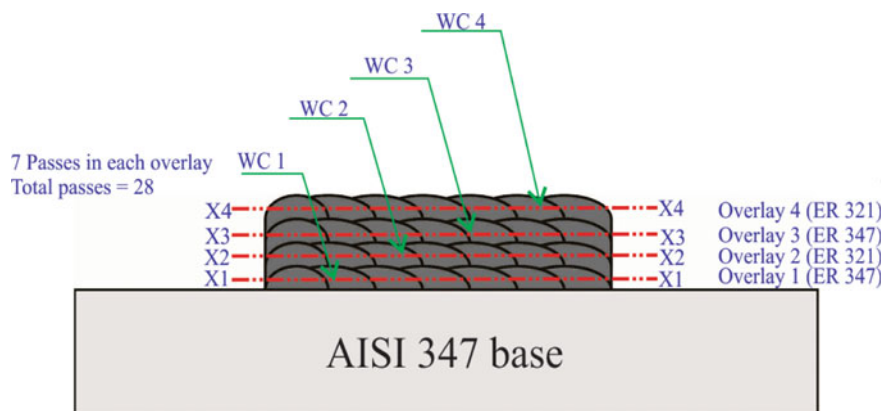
Schematic view of weld multi-pass and multi-layer overlaying using different fillers combination
